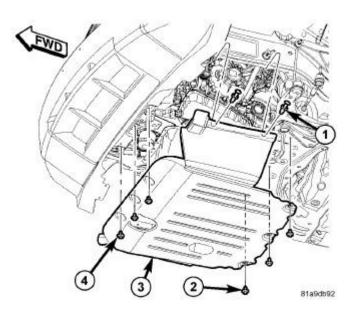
Removal/Installation Front Skid Plate And Bolts Courtesy of CHRYSLER GROUP, LLC
